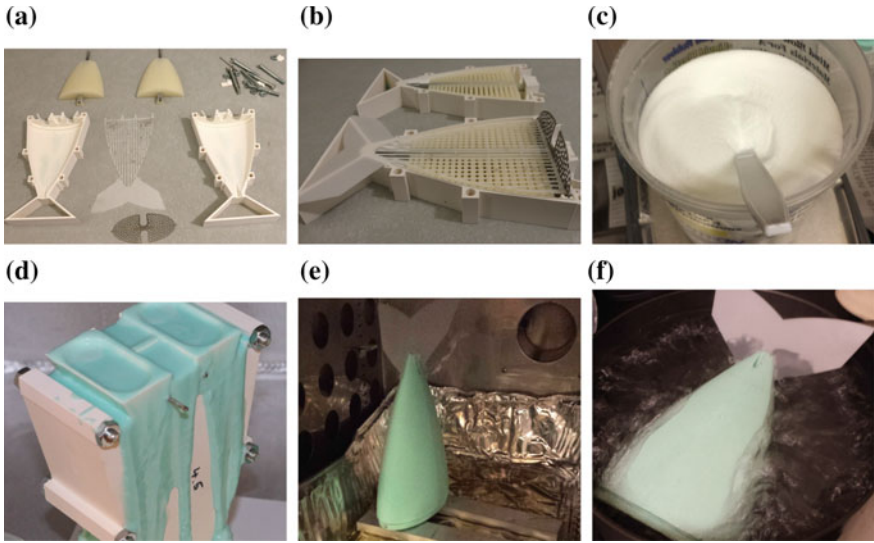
Final fabrication steps of the silicone rubber fish tail. a Individual parts of tail mold assembly. b Create silicone mold. c Release model core. d Heating wax and mold. e Pour wax with syringe. f Demolding of wax core
